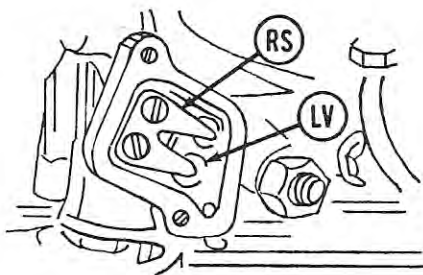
The crankcase bleeder valve may be serviced without disassembly of power head by removing the valve plate.
